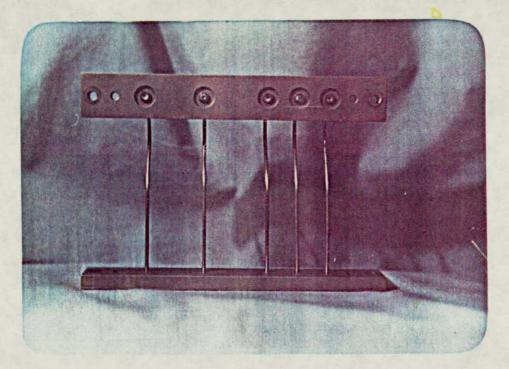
<u>Close-up of Input Tubing Manifold</u>. This view shows the o-ring grooves which are used for sealing interfaces throughout the system.
